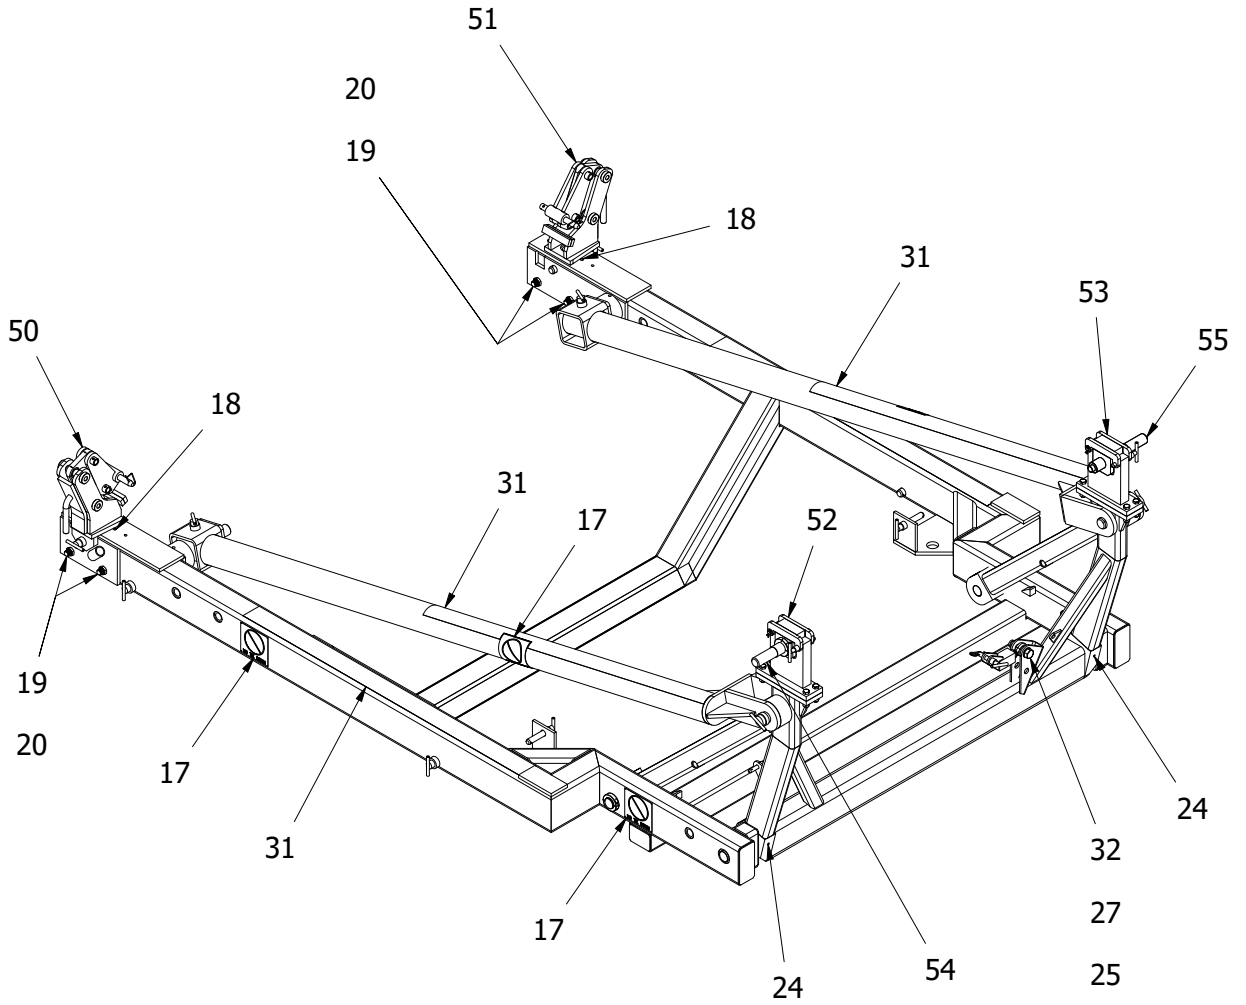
AM-1928-156-80E1 Cradle Assembly w/o Bootstrap Adapter for CF6-80E1
